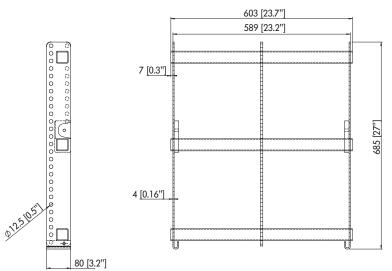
Z5159 Q Flying frame dimensions in mm [inch]
